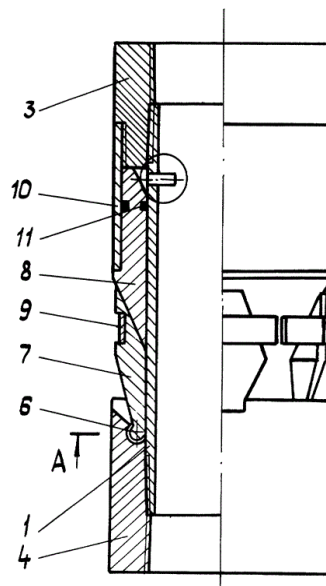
Hydraulic centralizer: 1 - the casing; 2 - the holes; 3, 4 - the couplings; 5 - the annular groove; 6 - the axes; 7 - the levers; 8 - the working piston; 9 - the split spring ring; 10 - the cylinder; 11 - the rubber rings
